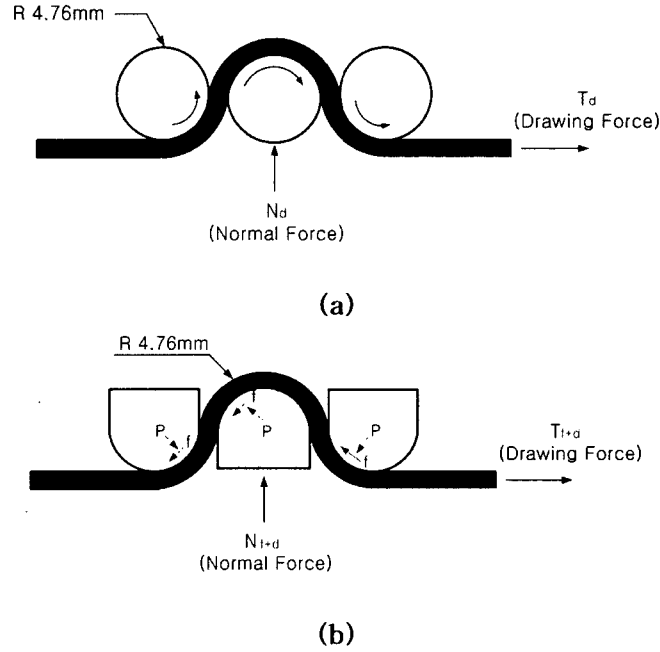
Aspect touched between bead and sheet (a) roller bead (b) fixed bead
